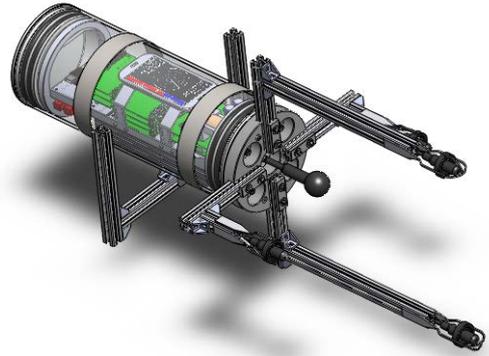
Final prototype of the MAST/AM tool made in SOLIDWORKS[®].
